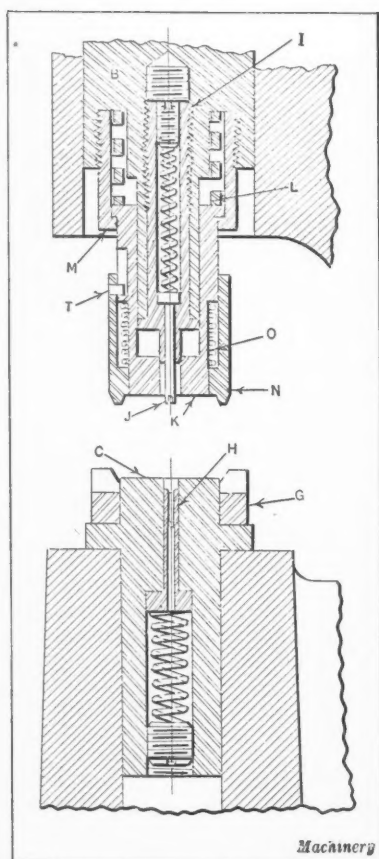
Cross-section of Shaft and Gear Assembling Dies
